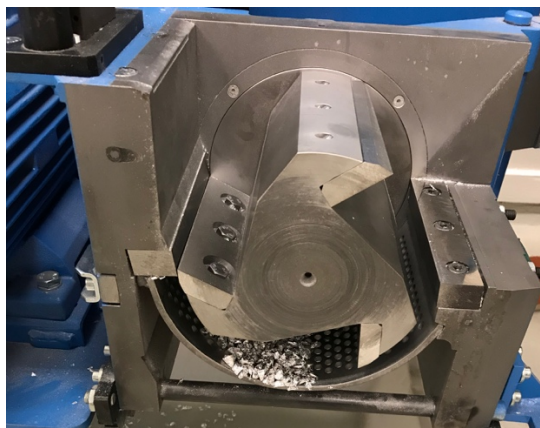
The interior of Getecha RS 1600 shredding machine showing the three rotary steel blades and shredded pieces too large to pass the screen.
